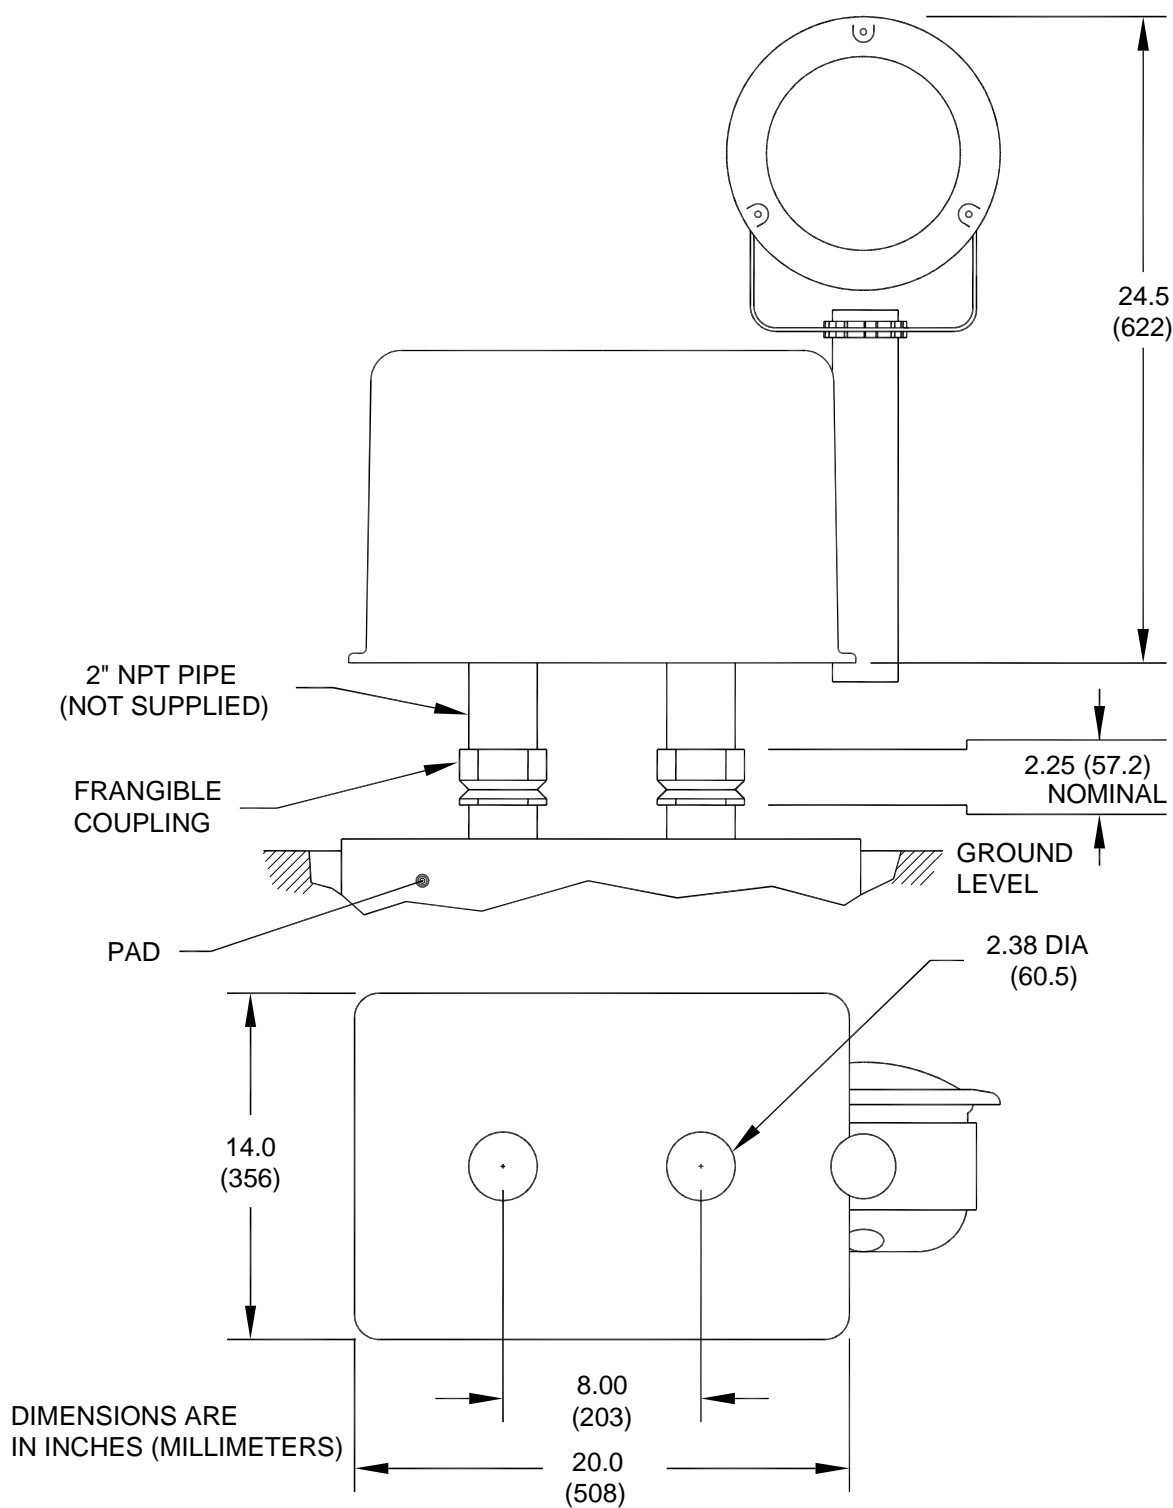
PC 800 and FH 800 Comounted Unit Mounting and Outline
